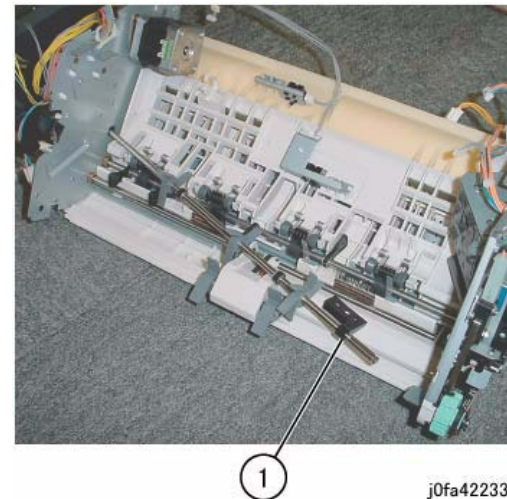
Removing the Main Paddle Shaft Assembly (j0fa42233)
